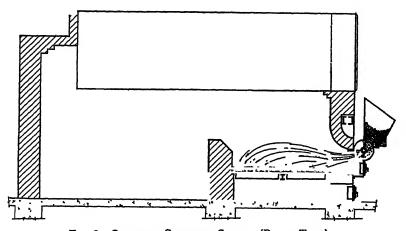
Overfeed Spreader Stoker (Rotor Type)
